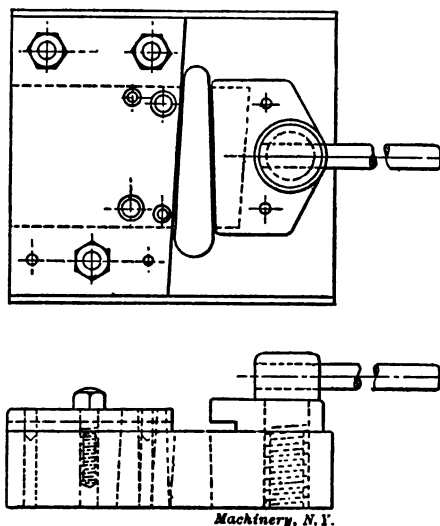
Die for Punching without Waste the Pieces shown in Fig. 64
